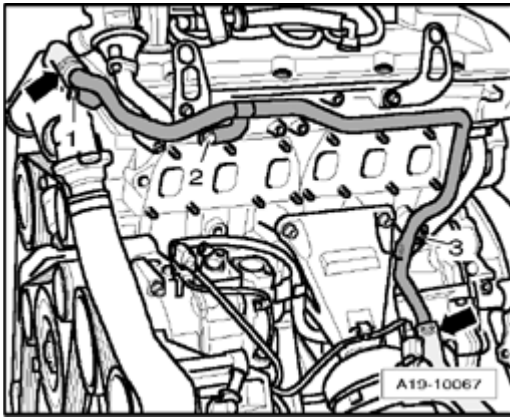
Coolant Hoses At Upper Left Coolant Pipe & Bolts
